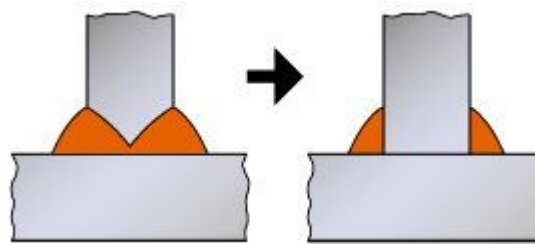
Two fillet weld for T-joint. (The welding institute 2010.)
